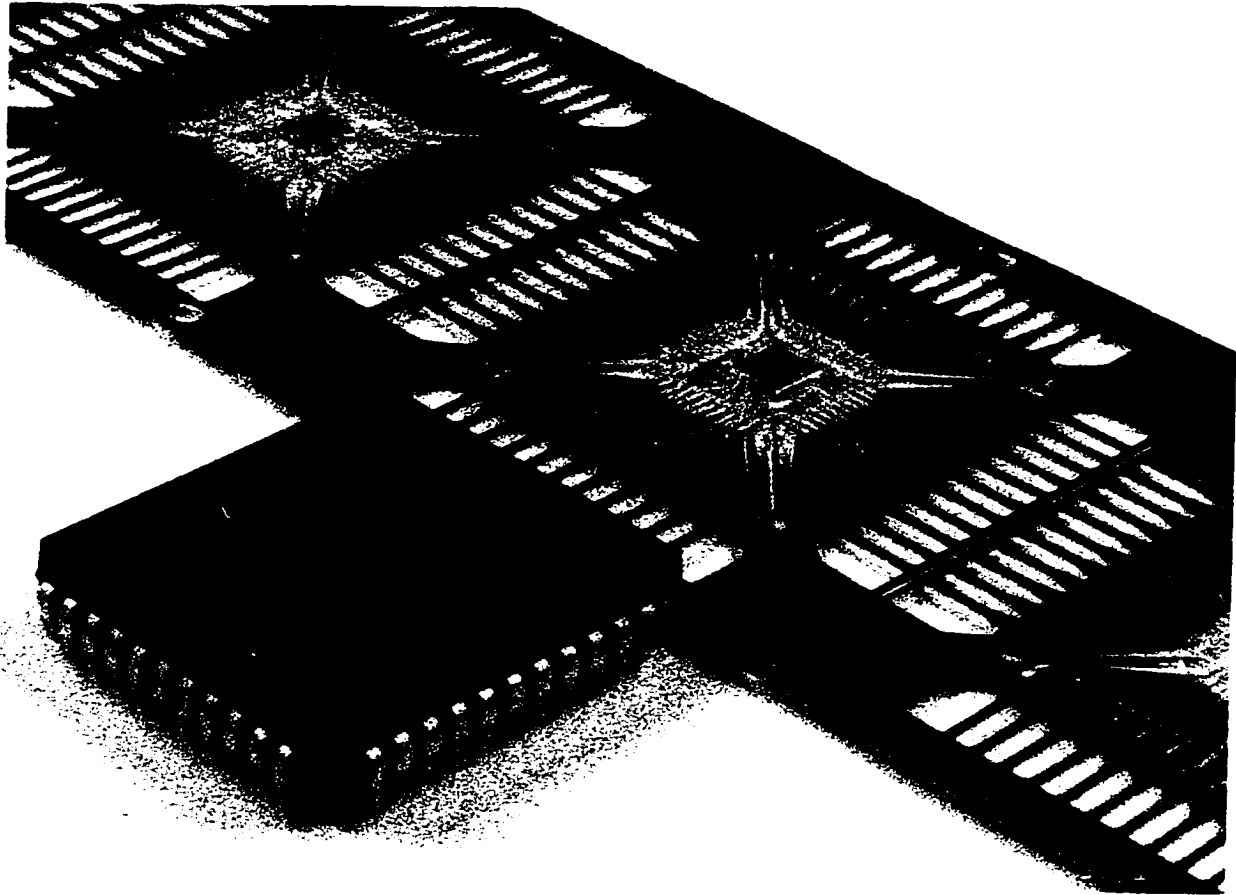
PLCC Package and Lead Frame Strip with Test Die
